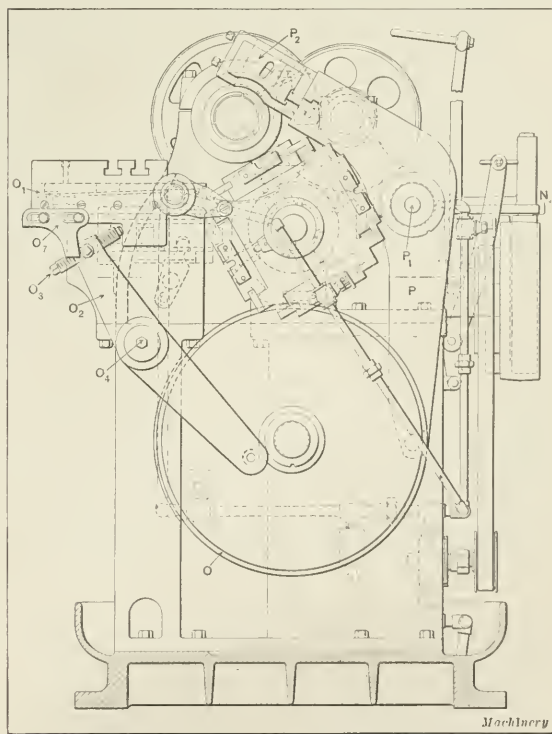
Diagram illustrating Method of operating Forming Slide and Cutting-off Arm, also showing Construction of Turret and Turret Slide
